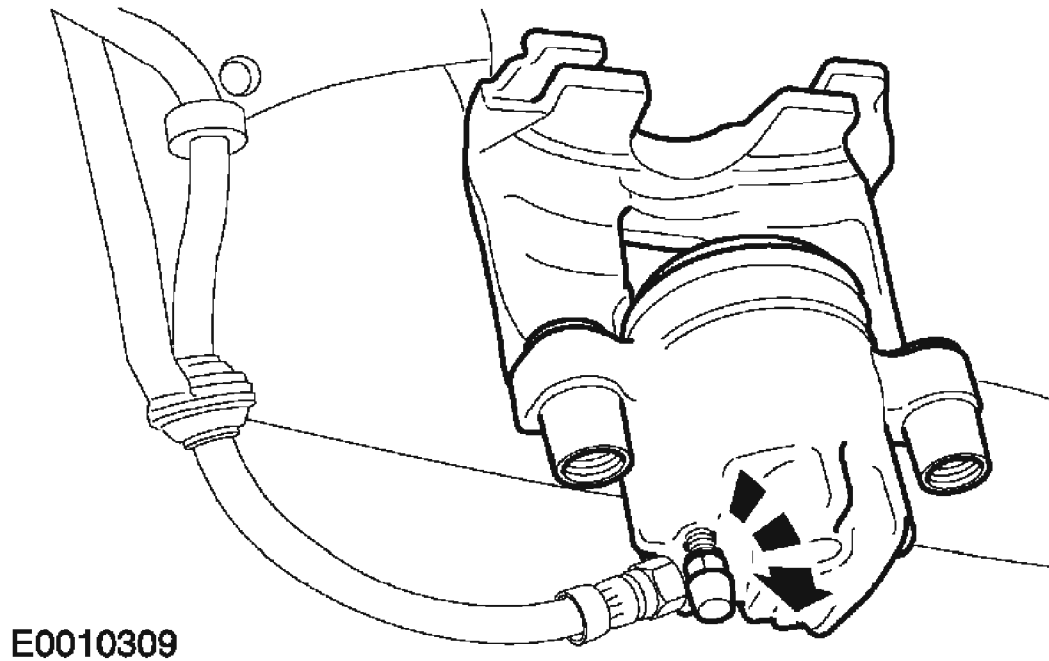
Disconnecting Caliper From Brake Flexible Hose
